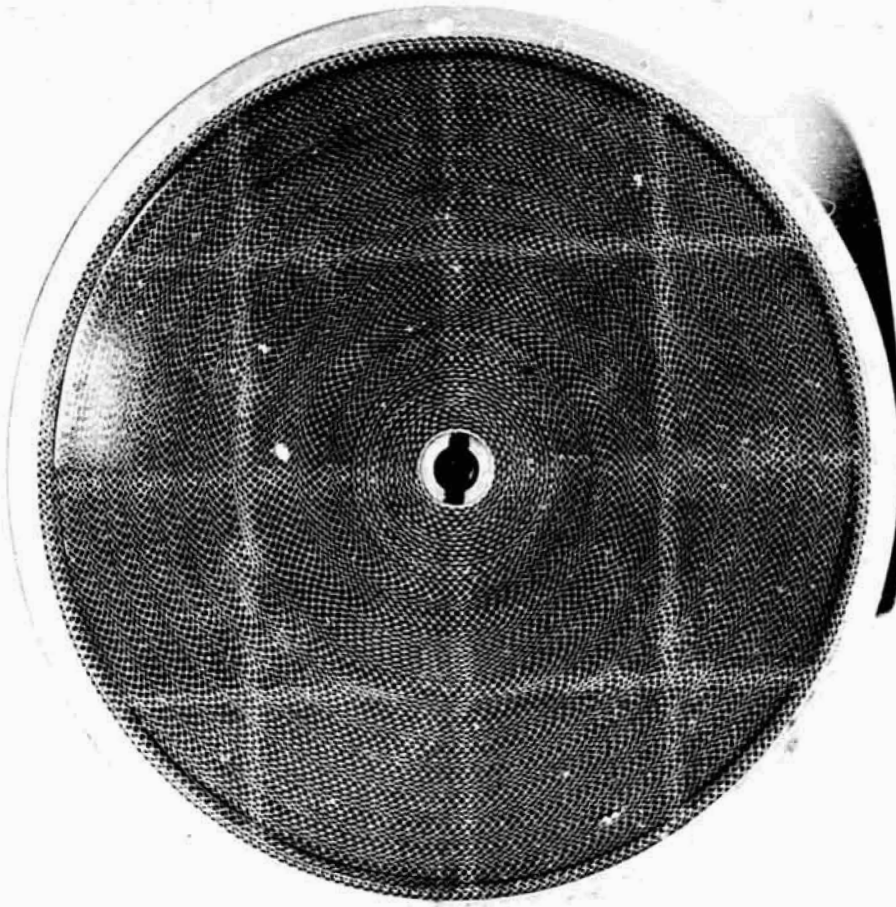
Shand and Jurs Spiral Wound, Crimped Aluminum Ribbon Arrester Core Posttest Showing Ribbon Separation
